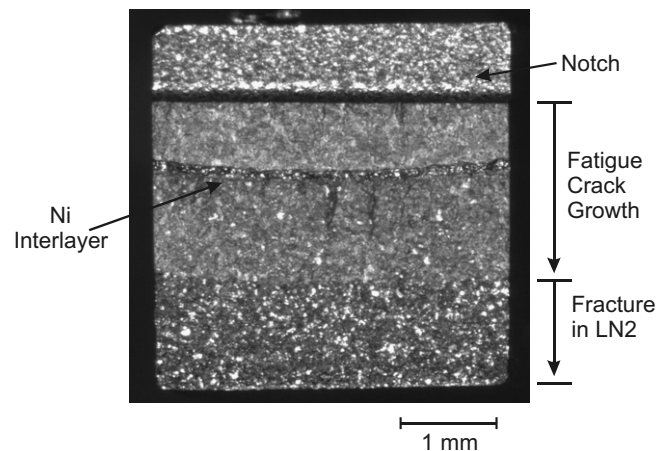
Overview of specimen JNC-22 fracture surface.
